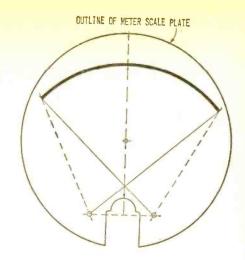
Draw new meter face outline, increasing old meter face diameter by scale enlargement factor. Enlarge original cut-outs and space between old mounting holes, using same enlargement factor.
